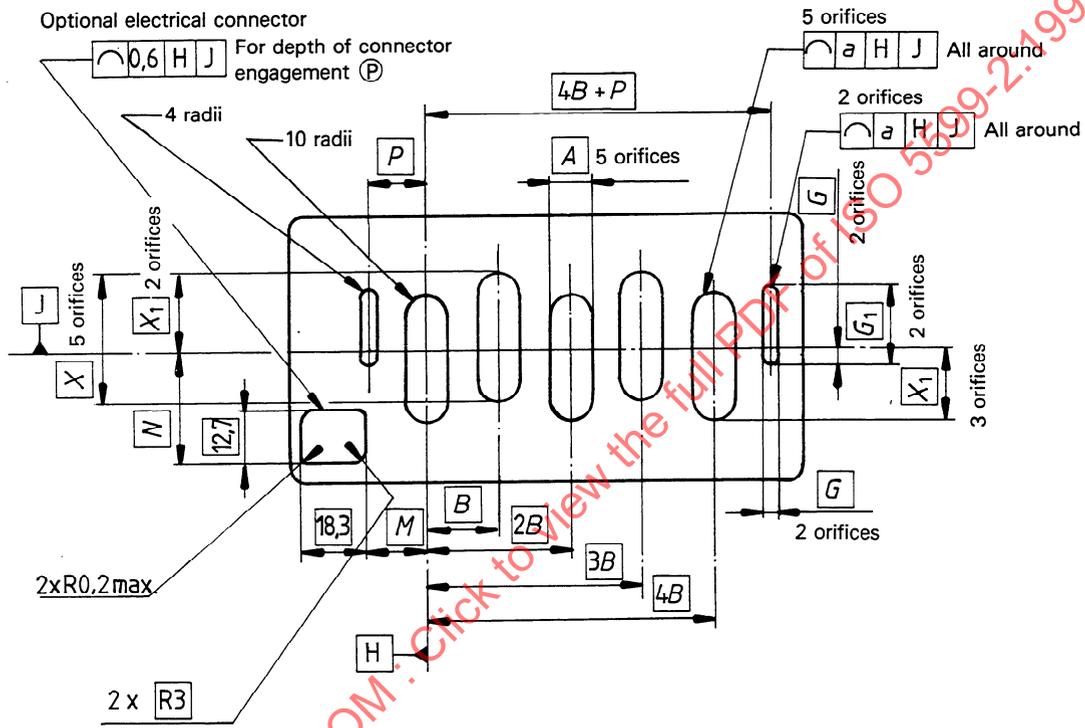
Dimensions and tolerances of form of interface features — Sizes 1E, 2E and 3E
